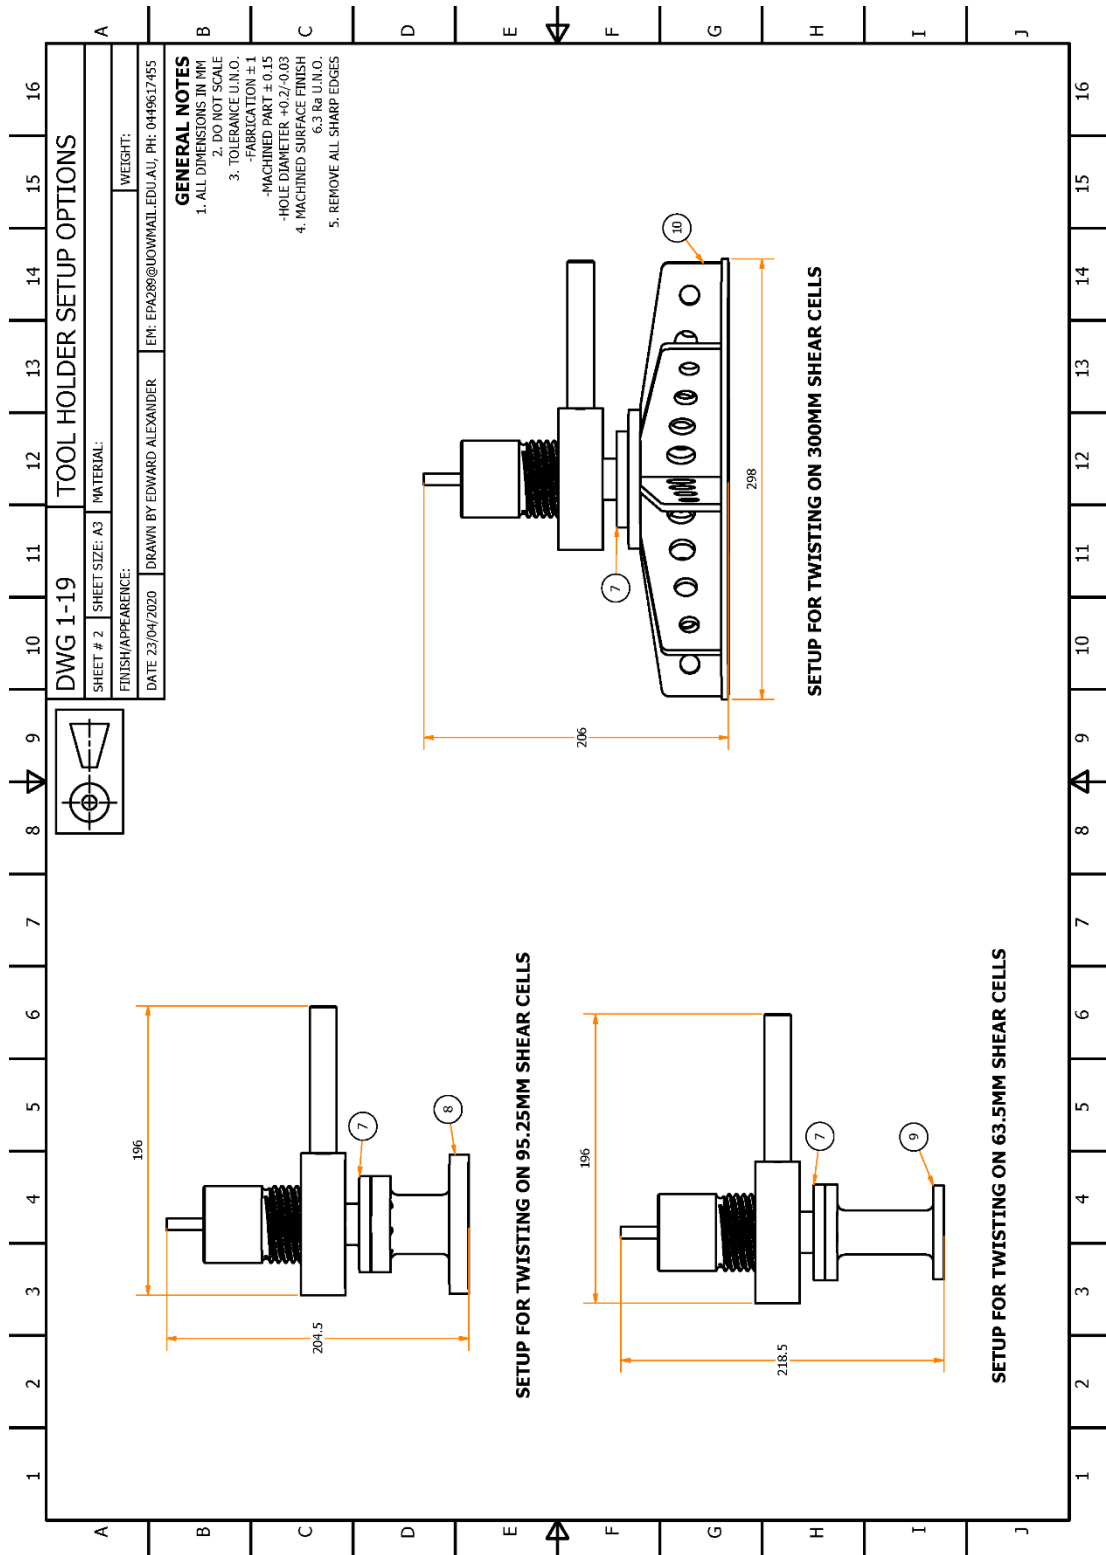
Drawing of tool holder with 63.5, 95.5 and 300 mm twisting lid configurations
